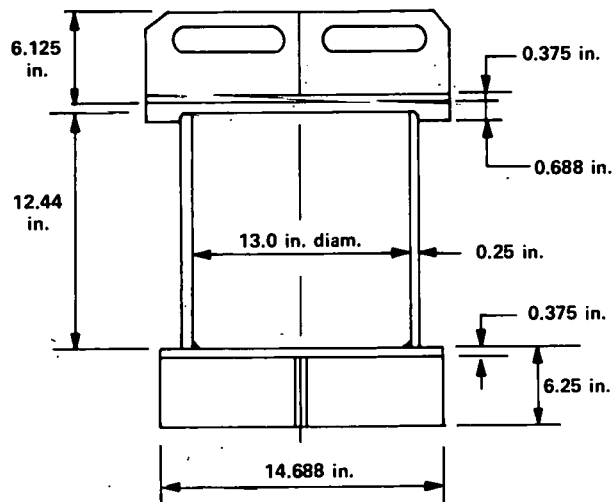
Sketch of configuration-3 inner container; aluminum with stainless steel bolts.
